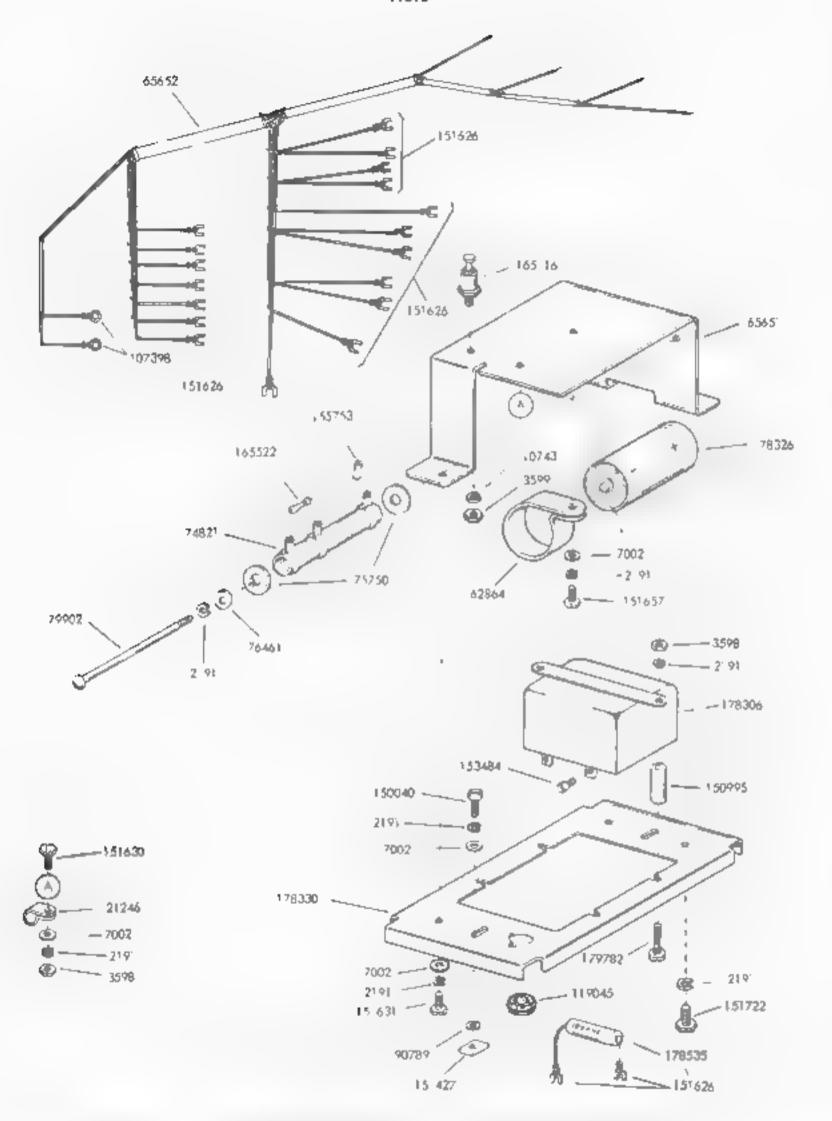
165650 MOTOR CONTROL AND ANSWER BACK RELAY ASSEMBLY
